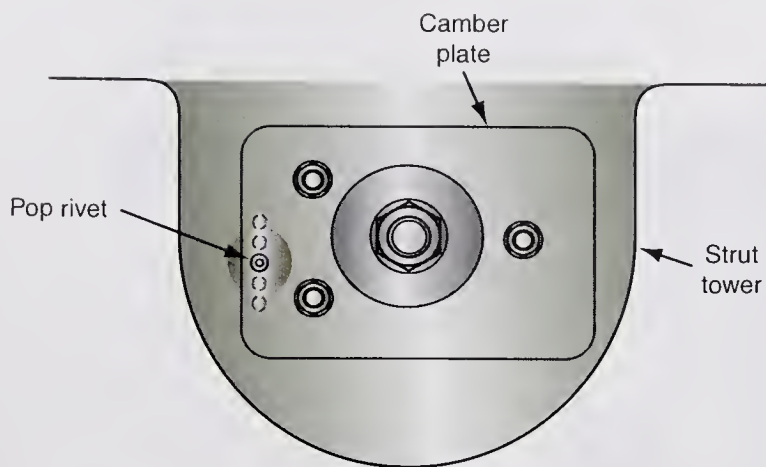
Upper strut mount with camber plate and rivet, modified MacPherson strut front suspension.
